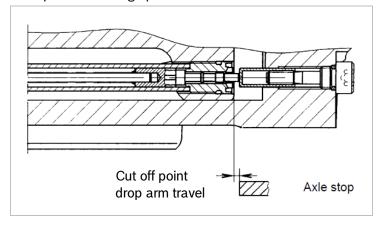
Left-hand steering limiter valve open, oil pressure highly reduced
